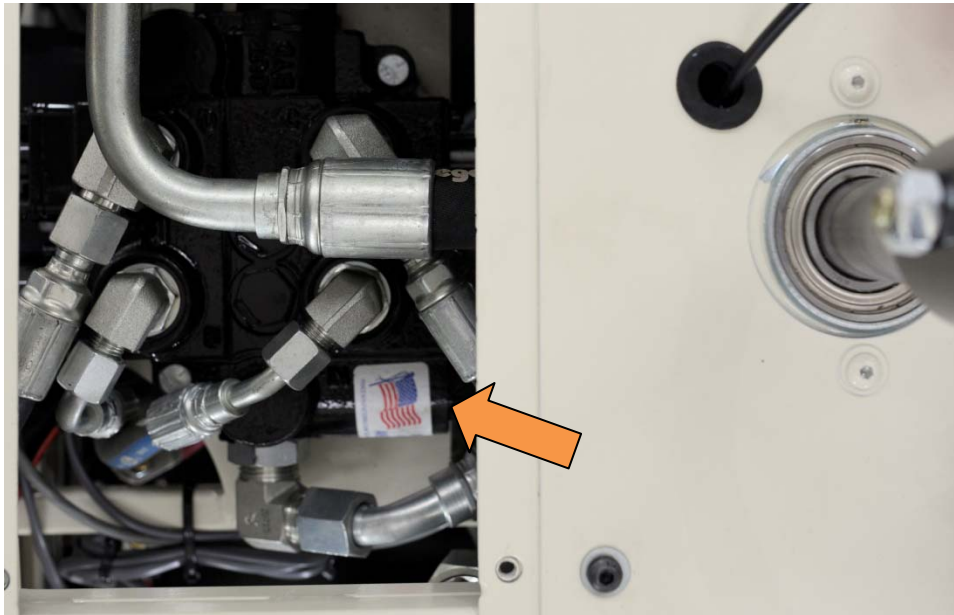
Hex plug that covers the pressure relief screw (view from above)
